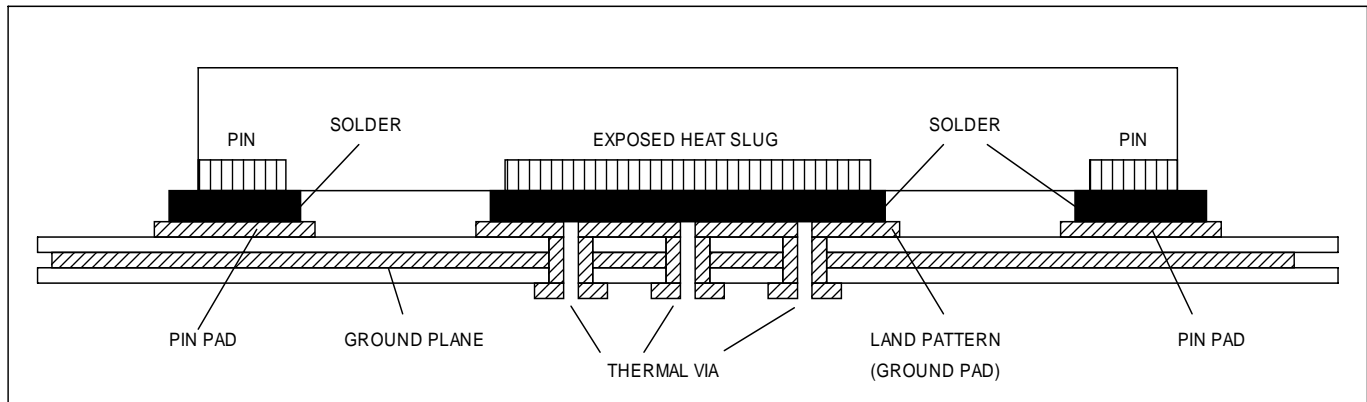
P.C. ASSEMBLY FOR EXPOSED PAD THERMAL RELEASE PATH –SIDE VIEW (DRAWING NOT TO SCALE)
